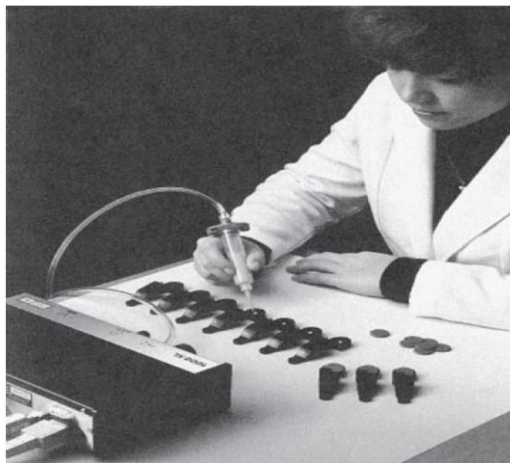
Adhesive is dispensed by a manually controlled dispenser to bond parts during assembly.
